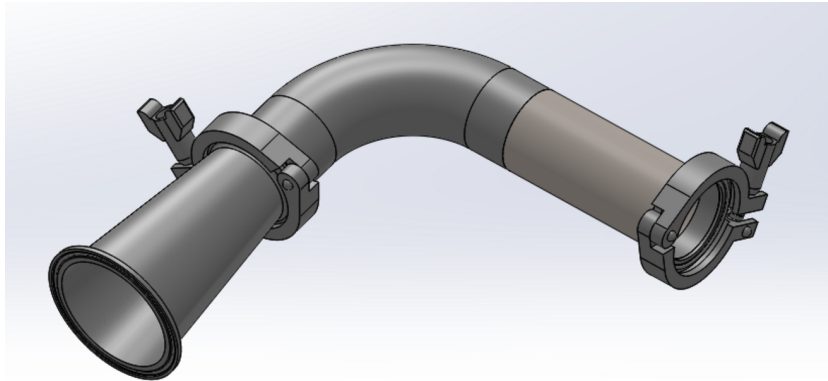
SolidWorks model of parts connecting exhaust plenum to EGR cooler. The opening on the right attaches to the exhaust plenum with a clamp while the opening on the left is to be welded to the EGR cooler.
